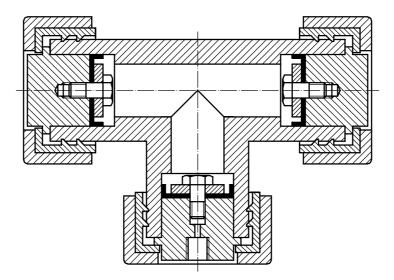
Example of pressure-tight test piece with mechanical joints involving external threads or machined grooves and with hydrostatic end thrust
